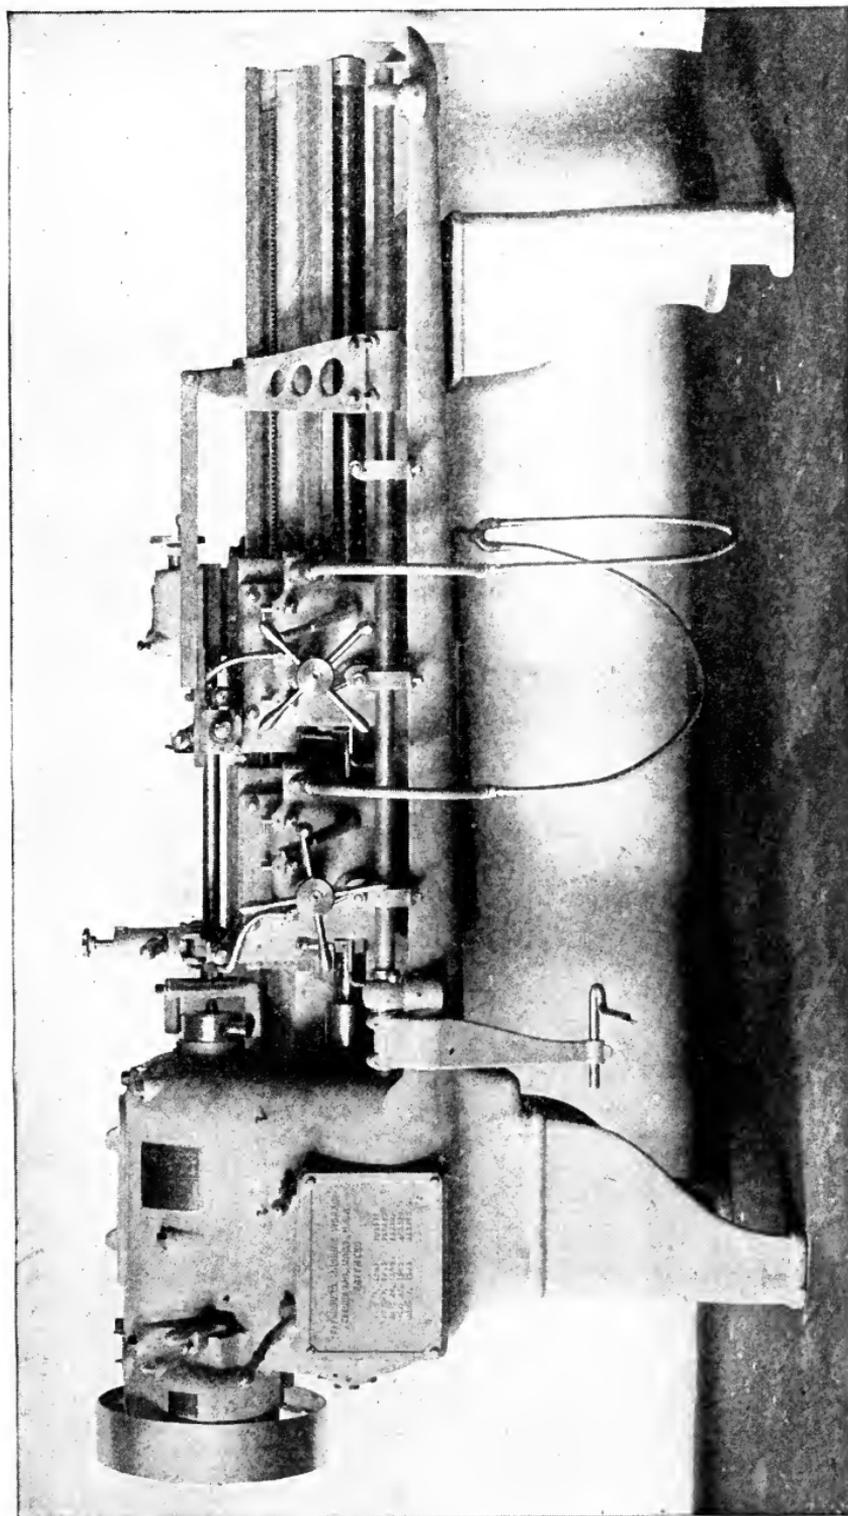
"Lo-Swing" Turning Machine with Work in Progress
